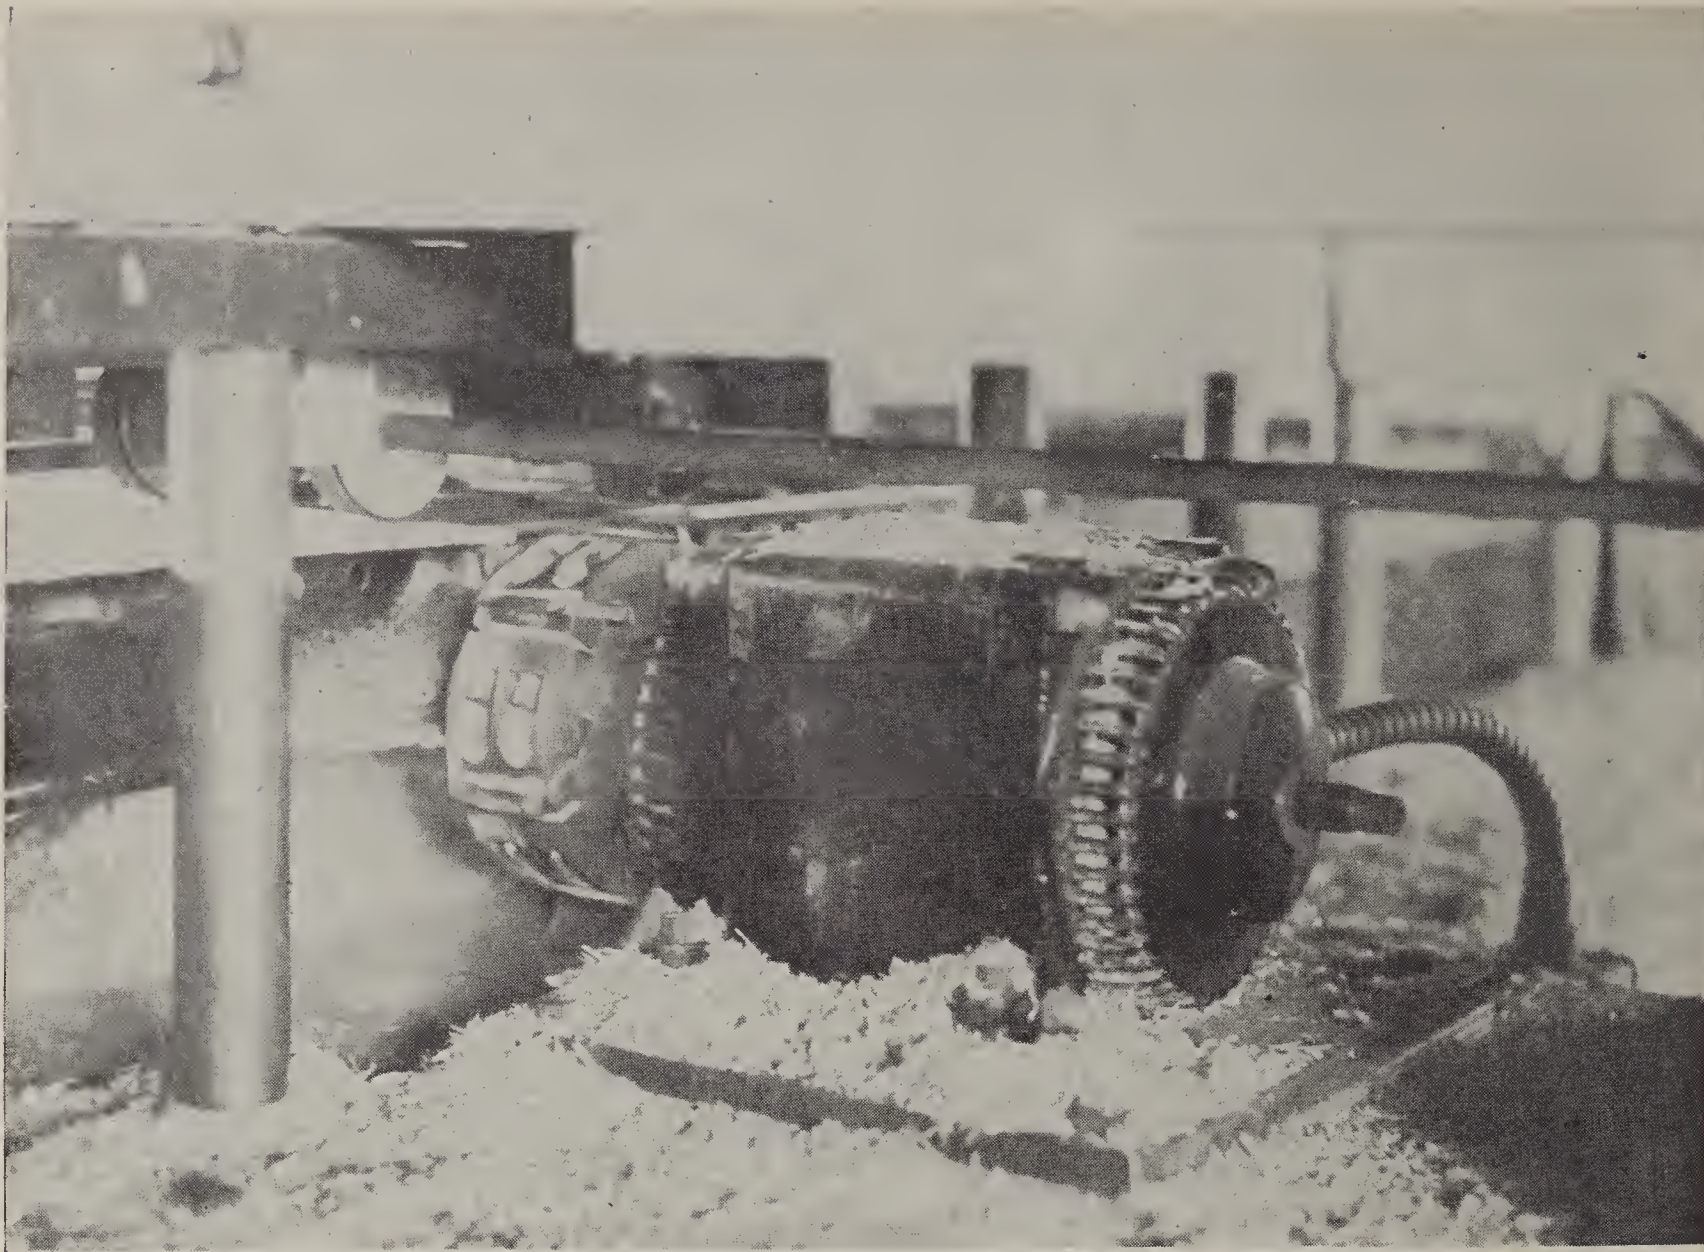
Adaptation of molder-type cutter head with shaped knives to make wide concave cut in the face of a plywood sheet along the edges.
